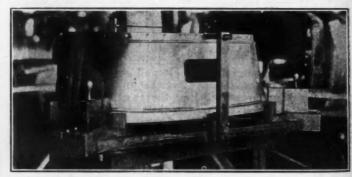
Inspection of the Finished Shroud All Vital Points Are Checked by Positive Blocks and Gages
